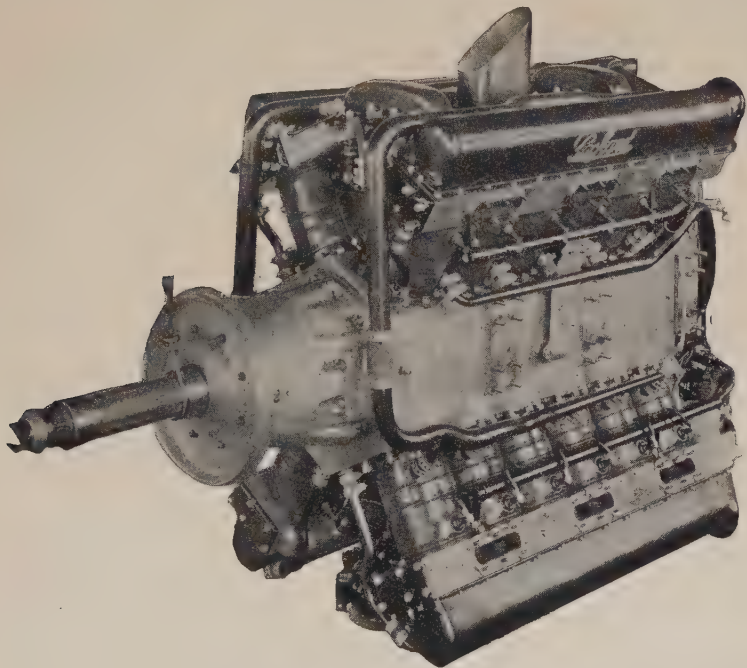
A three-quarter view of the Packard, 24 cylinder, X-type airplane engine.
